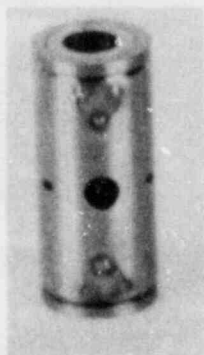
Assembled Fixture Containing Mandrel Specimen.
